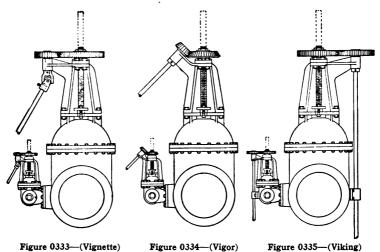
Spur Gearing with operating shafts fitted with universal joints to operate at any angle up to 30 degrees.
